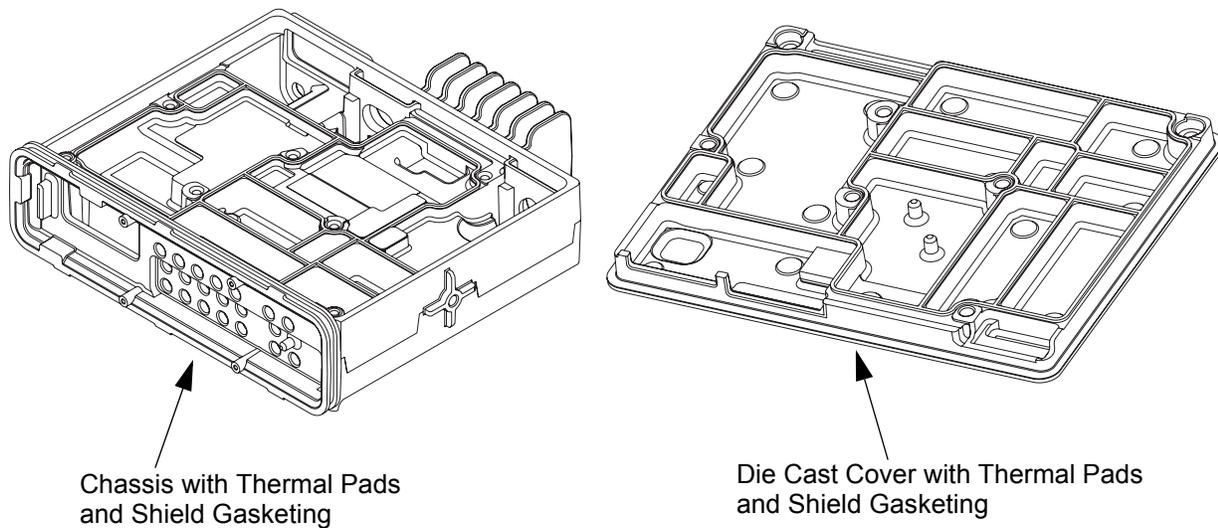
Thermal Pads and Shield Gasketing on Chassis and Die Cast Cover
